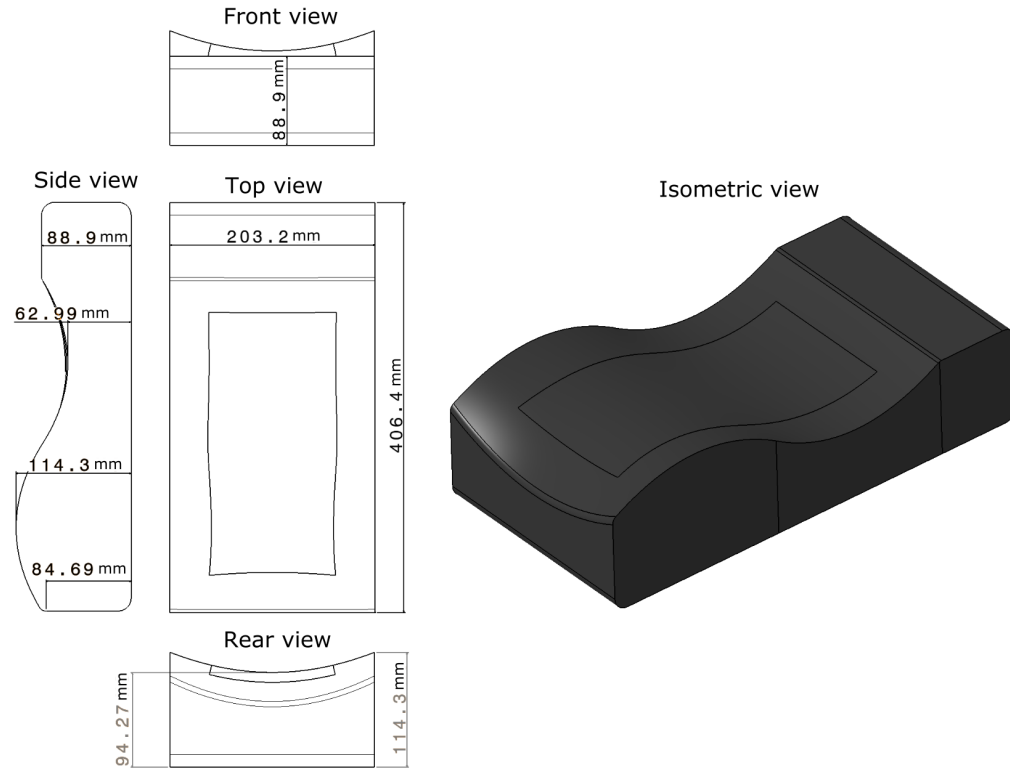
Orthographic projection of the mold life experiment tool with dimensions.
